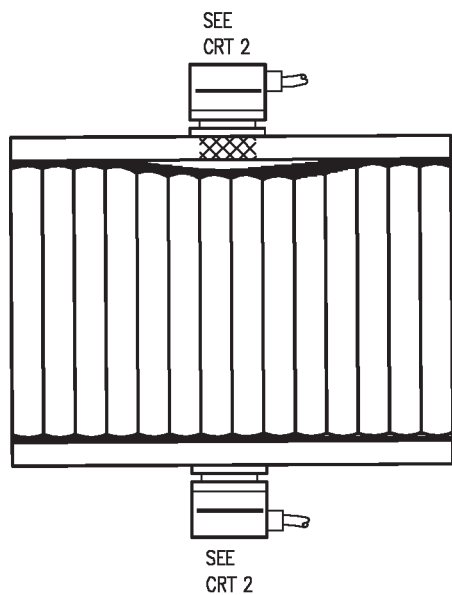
Definition and Examples of Shear Path Failure (Sheet 3)
